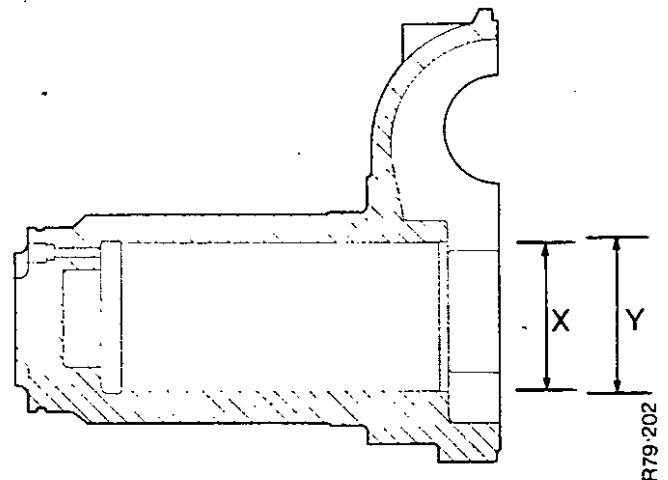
INSPECTION OF THE RAM CYLINDER
